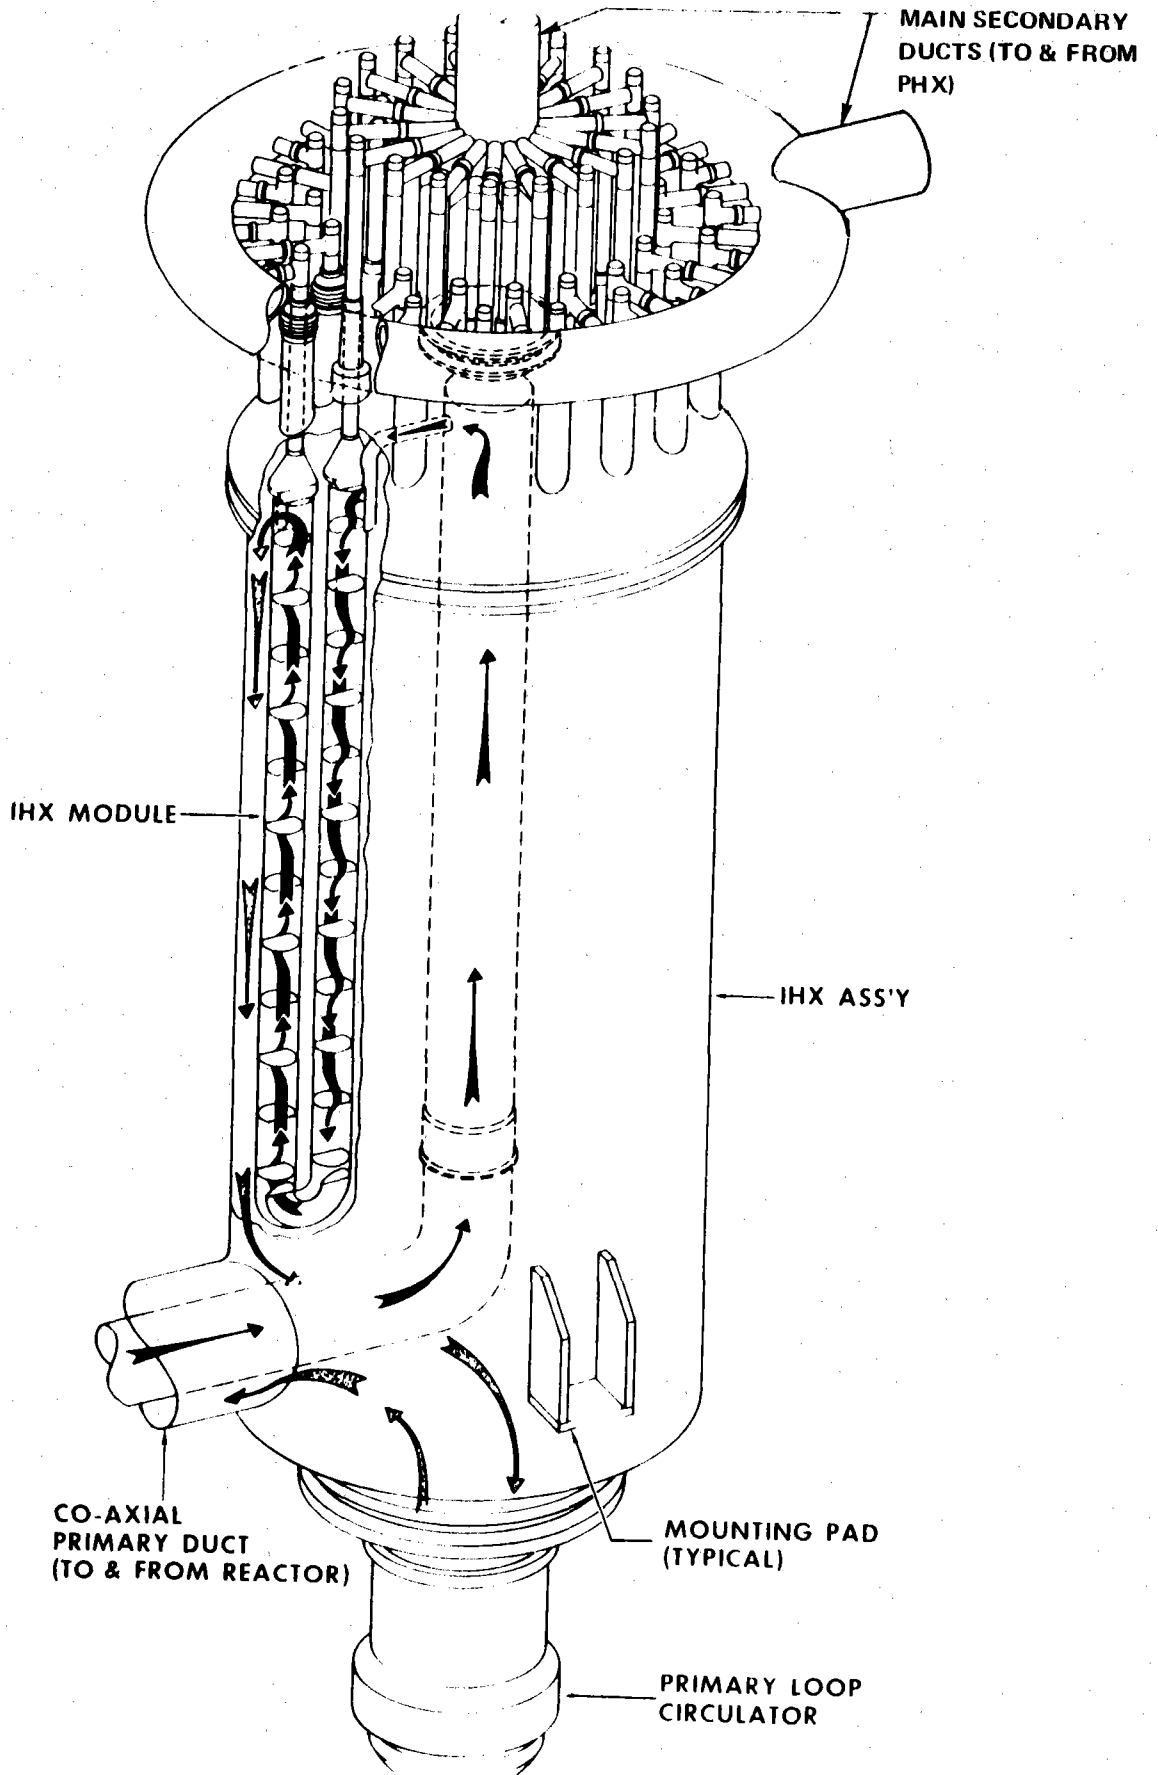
U-Tube Style Intermediate Heat Exchanger Assembly (Reference Design).
